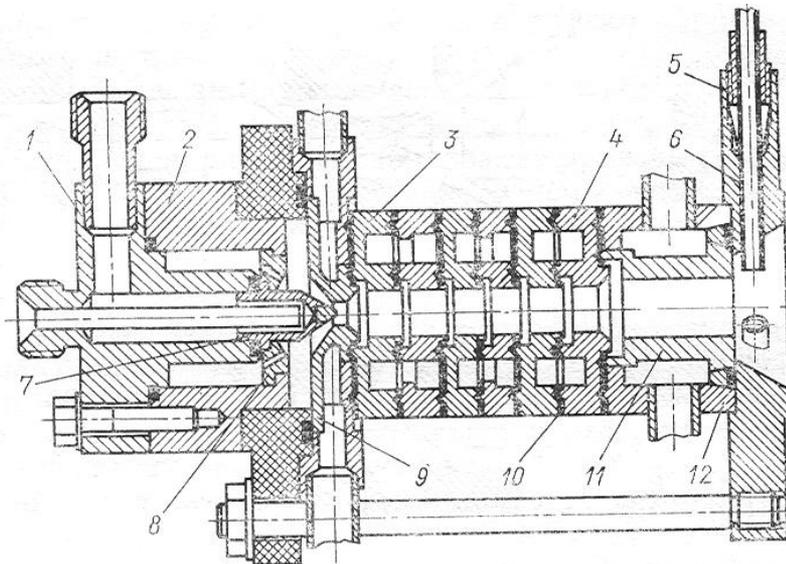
Plasmatron with a sectioned interelectrode insert. 1, 2, 7, 8 - cathode assembly, 3, 4 - MEW section, 5, 6 - powder input, 11, 12 - anode assembly.
